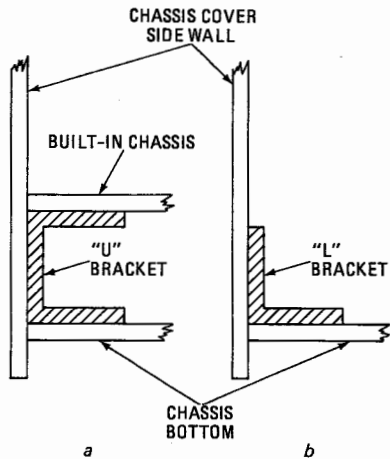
THE CABINET has a built-in chassis that must be removed and modified before the PC board can be mounted. See text.
